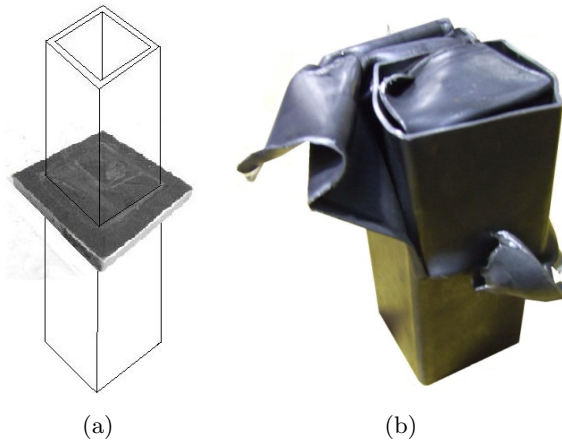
(a) Rigid plate which was inserted between the top and bottom tube of each plate divided specimen and (b) tearing of two tubes without a rigid plate in between the two tubes.
